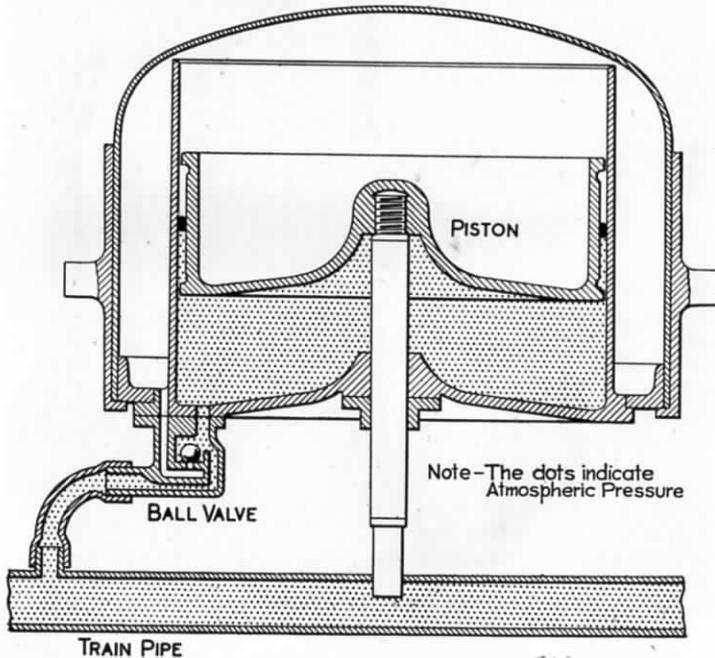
AUTOMATIC VACUUM BRAKE, "ON."
